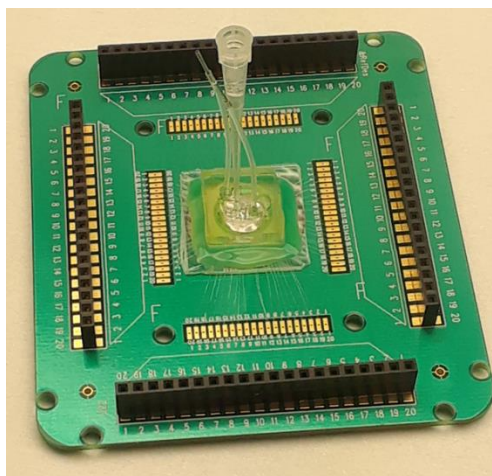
Fixed-gap Chip Assembly. Chip is connected to PCB by wire bonds. PDMS fluid cell is attached to chip with silicone gel and contains ports for fluid inlet and outlet and reference electrode insertion. Fluid cell interior is a single unstructured chamber.
